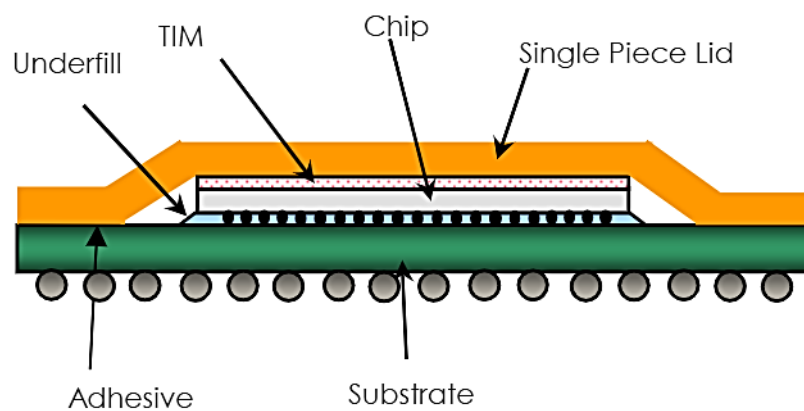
Cross-sectional View of Flip Chip Package with Heat Spreader (Gan et al., 2009)
